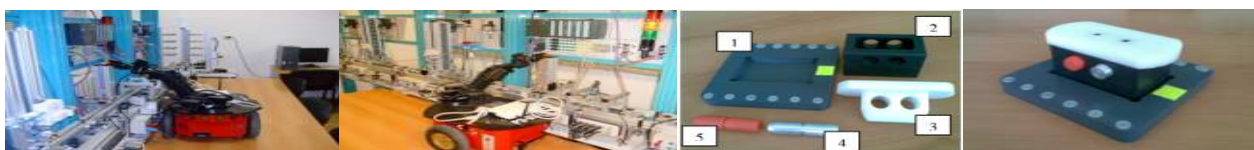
a) and b) assembly line, Hera, served by WMR, Pioneer 3-DX, equipped with RM, Pioneer 5-DOF Arm; c) parts; d) assembled product
